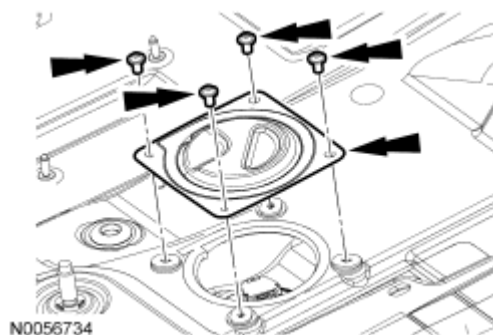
Identifying Fuel Level Sensor Access Cover & Bolts
